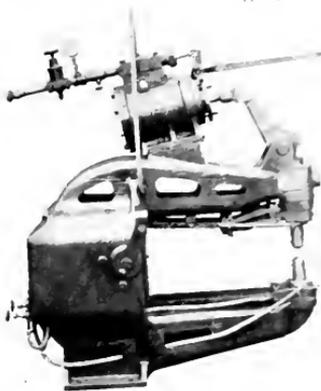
Portable Electric Spot Welder with 27-in. Reach
